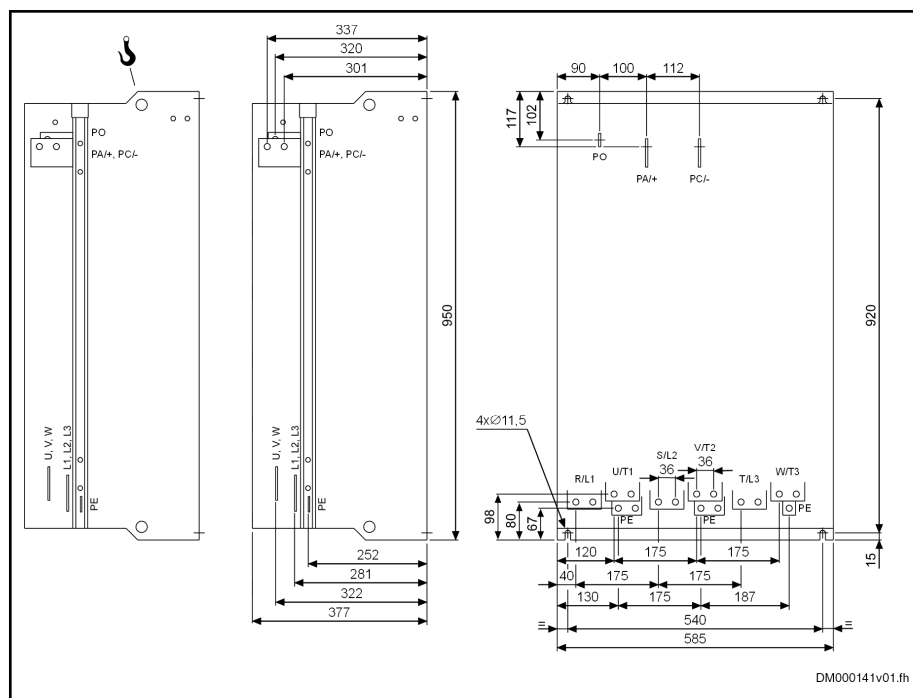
Dimensions IndraDrive HCS04.2E-W0640; HCS04.2E-W0790
